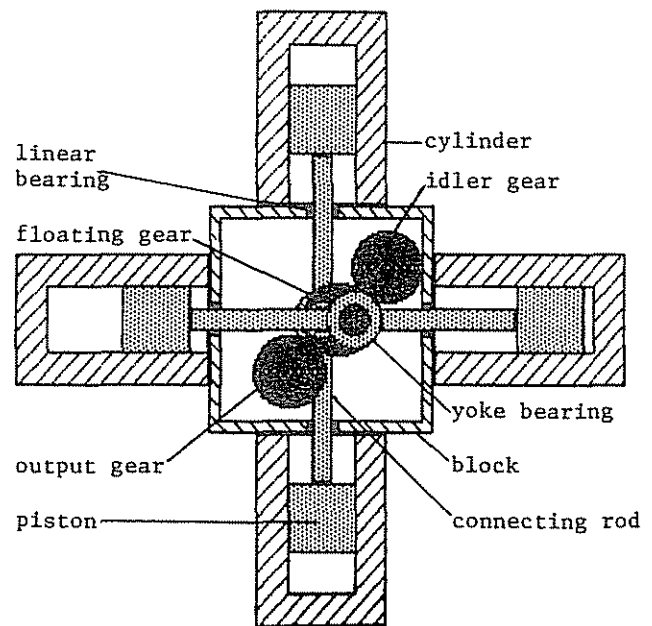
Gear Train of the Stiller-Smith Mechanism
